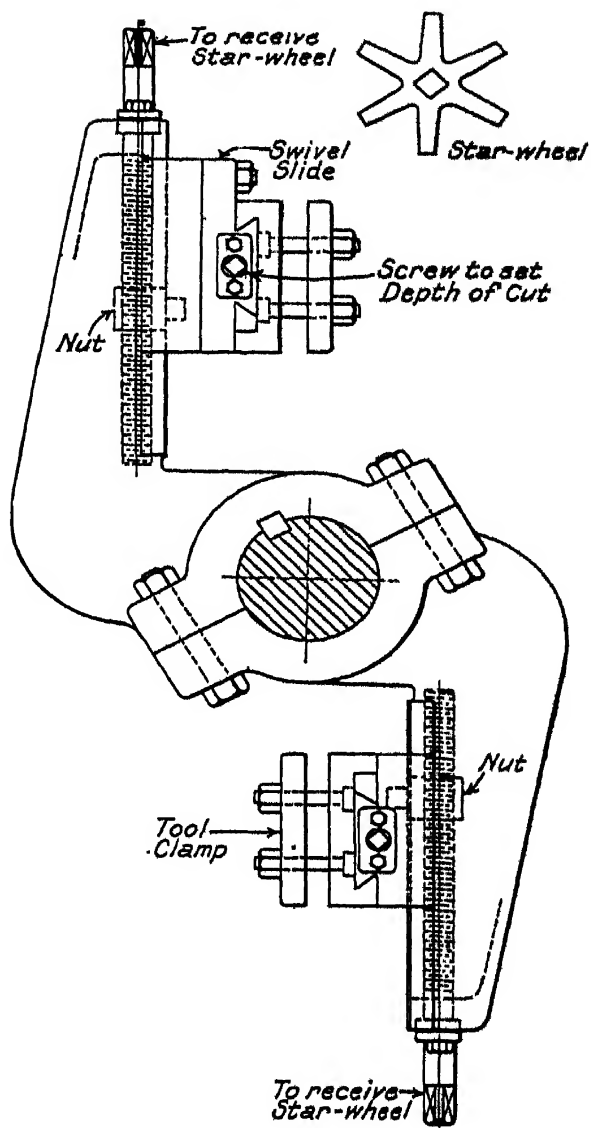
FACING ATTACHMENT BOLTED ON BORING BAR
